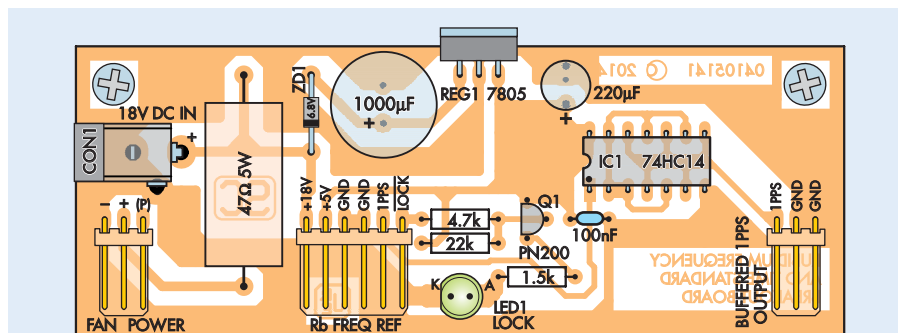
install the parts on the breakout PCB as shown here, taking care to ensure that all polarised parts are correctly oriented. Note that REG1's tab must be fastened to the metal end panel of the test jig for heatsinking.
